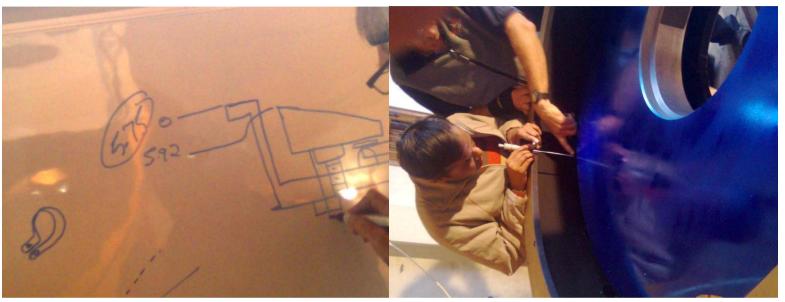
desired height to be achieved explained by Ian (left), using depth micrometer to measure the mirror height (right)
